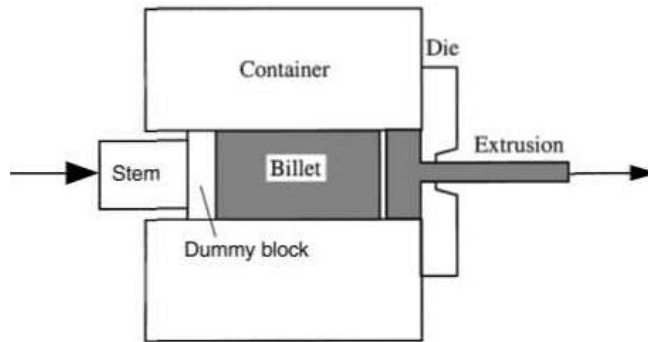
Billet-on-billet extrusion (method two) [5]
